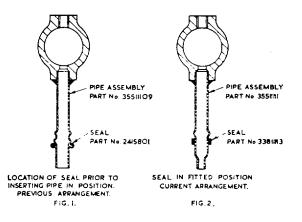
Showing location of "O" Ring prior to fitting Rocker Shaft.
